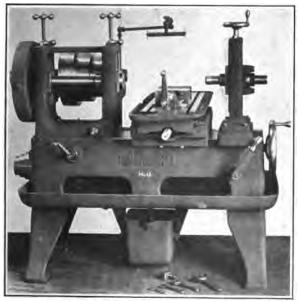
Lincoln milling machine. (Courtesy Pratt & Whitney Co.)
